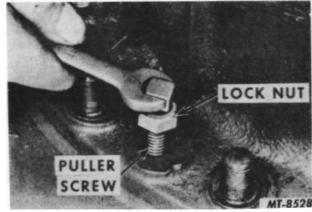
Puller Screw Installation (Locknut is used if puller screw is to be kept with axle at all times.)
